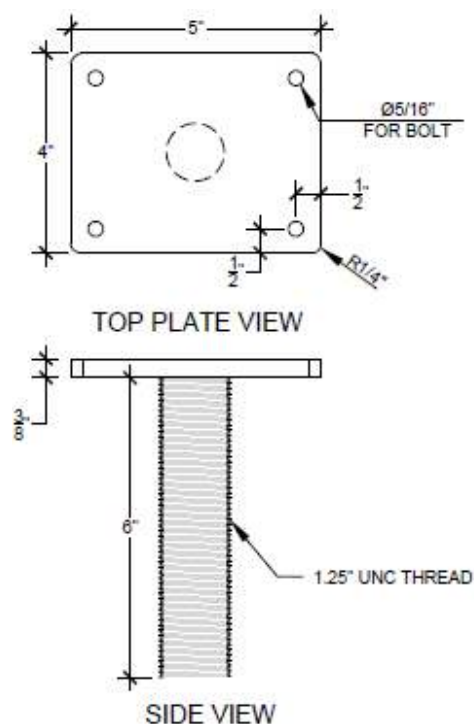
THREADED ROD AND TOP PLATE ASSEMBLY
